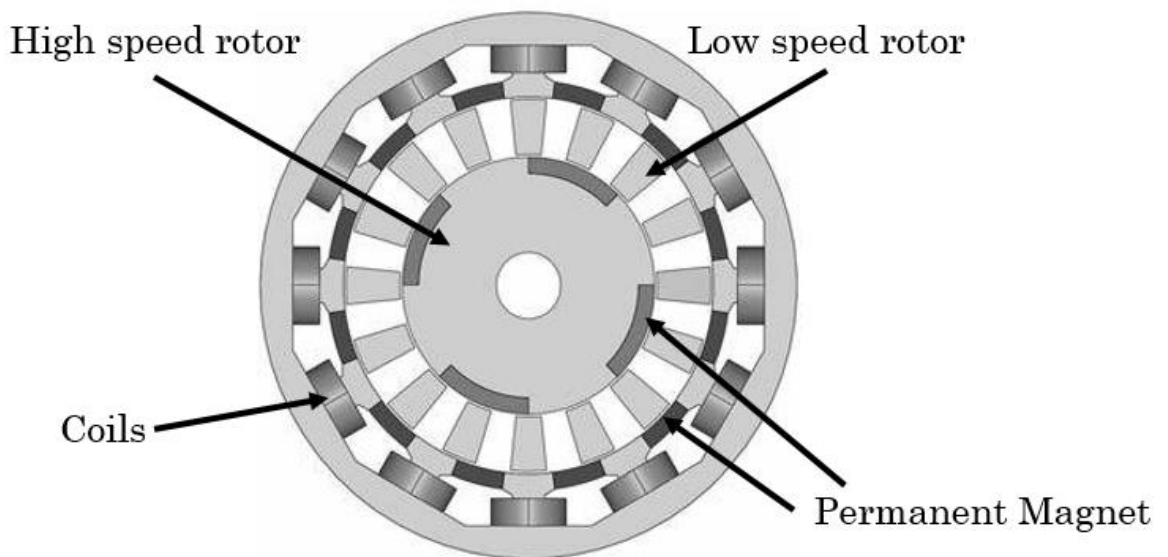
Niguchi's high torque type magnetic geared motor with half permanent magnet[20]
